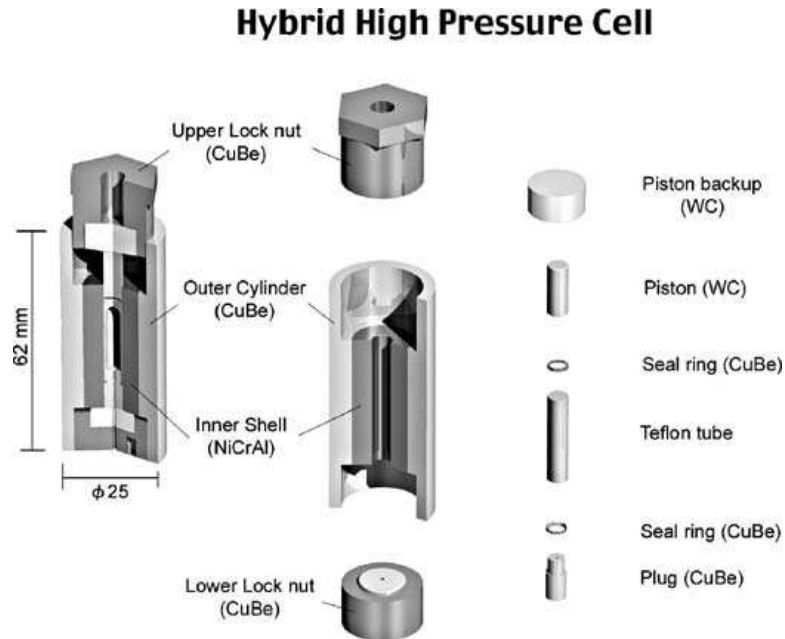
Cross-section view of a hybrid high pressure cell. Picture taken from [101].
